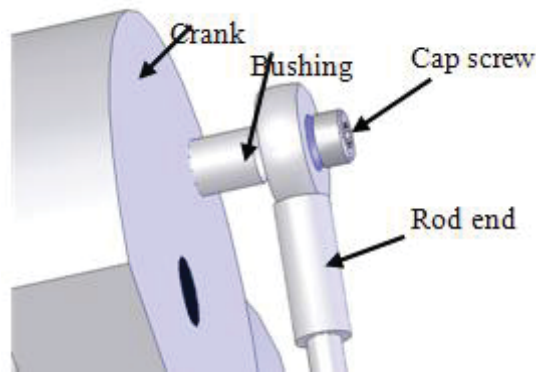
The assembling and attachment of crank and couplers via cap screw (Pap 2005)
